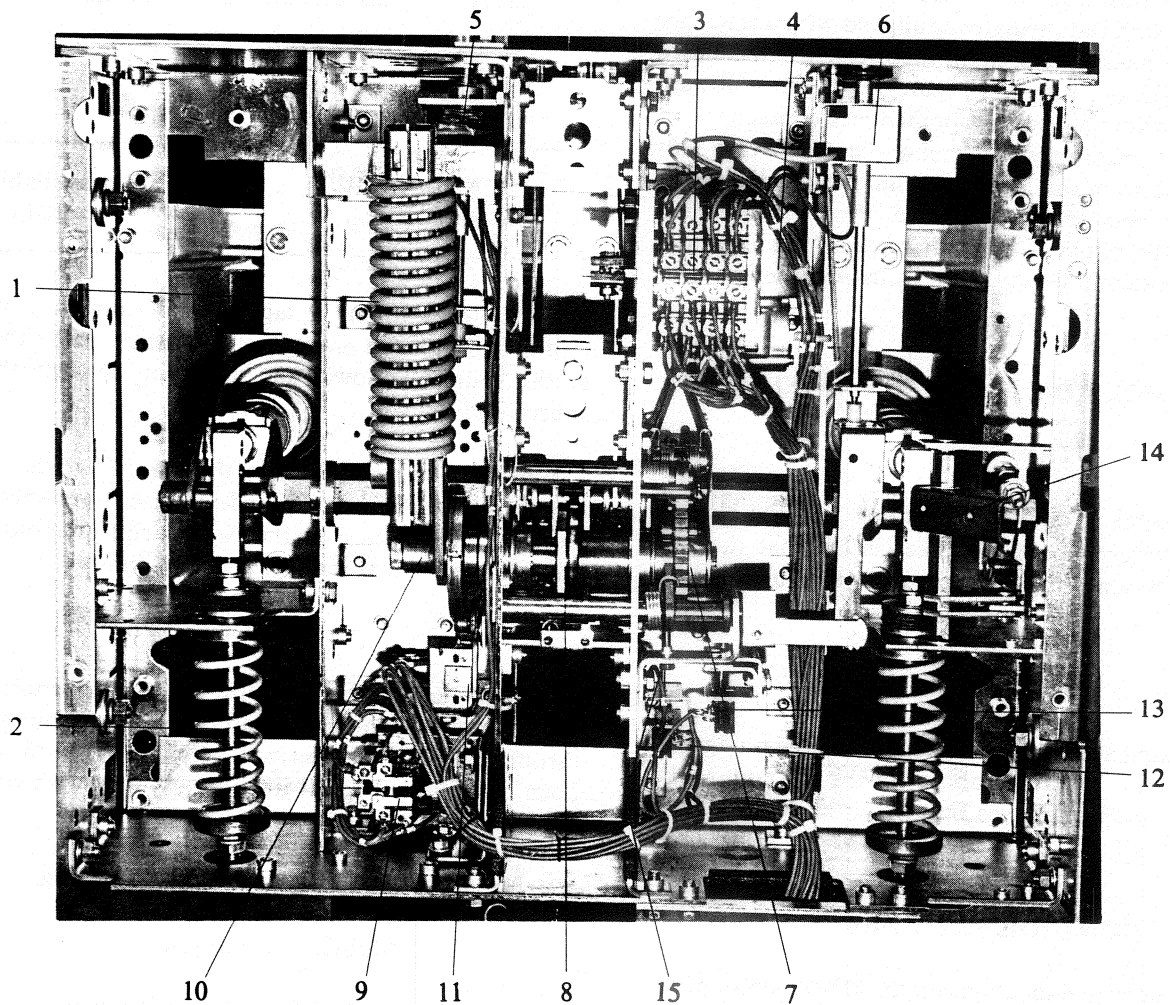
BOTTOM VIEW OF ML-18 SPRING CHARGED MECHANISM
